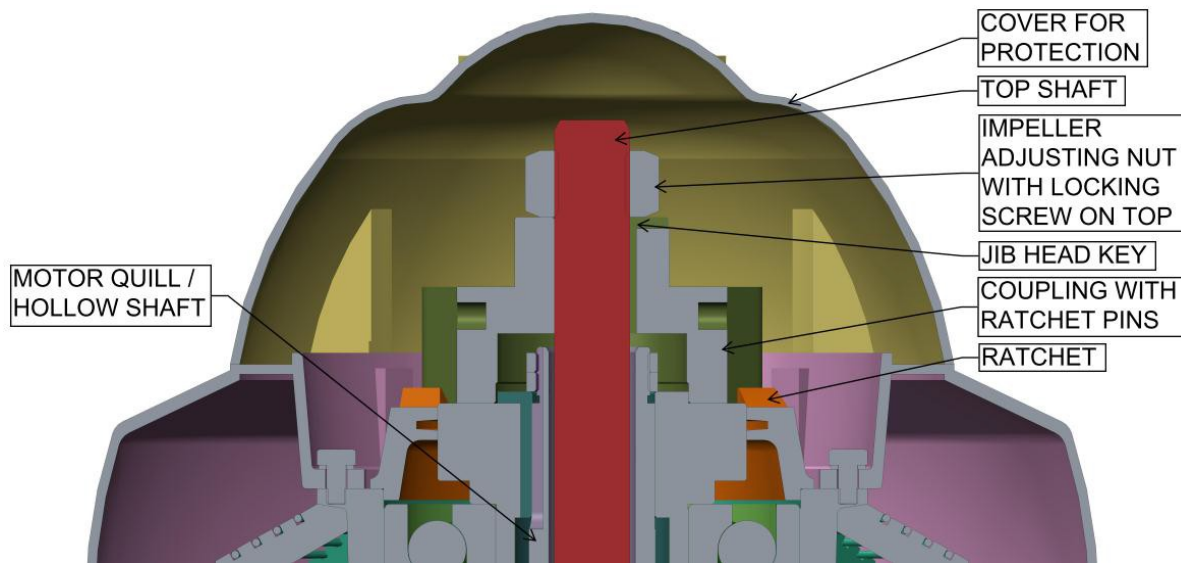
Impeller Adjustment in Hollow Shaft Motor
